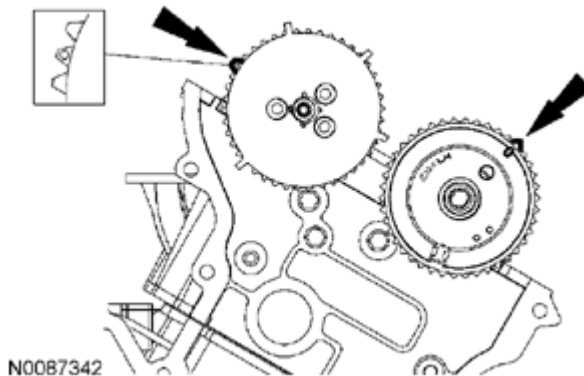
Identifying LH Camshafts Are In Neutral Position
